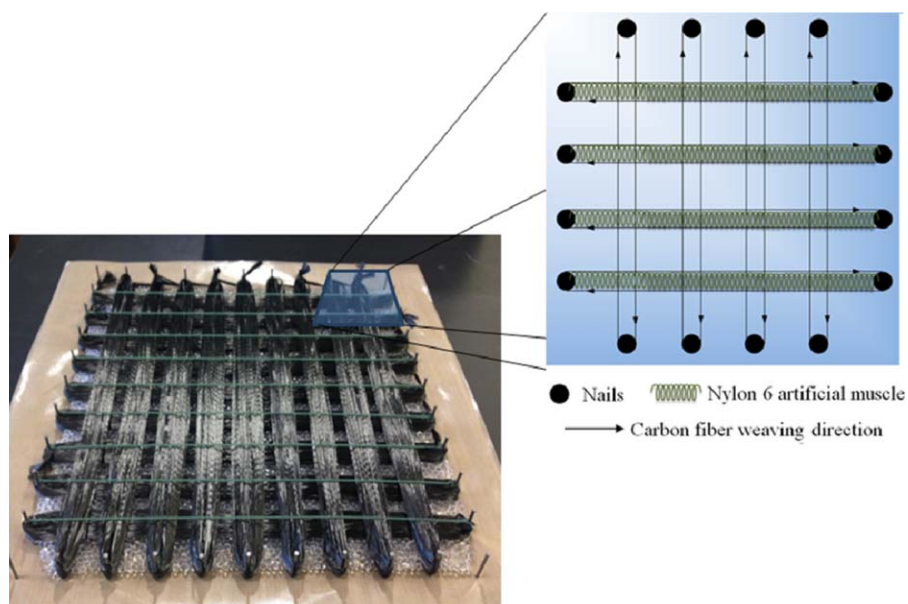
Schematic of mold preparation and ionomer composite fabrication. The enlarged area shows the winding pattern. [Color figure can be viewed in the online issue, which is available at wileyonlinelibrary.com.]
